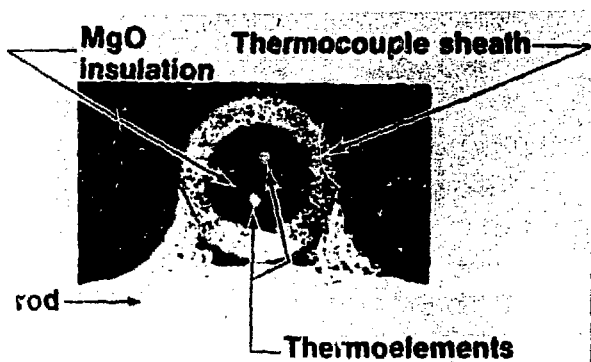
LOFT thermocouple weld with excessive penetration.
